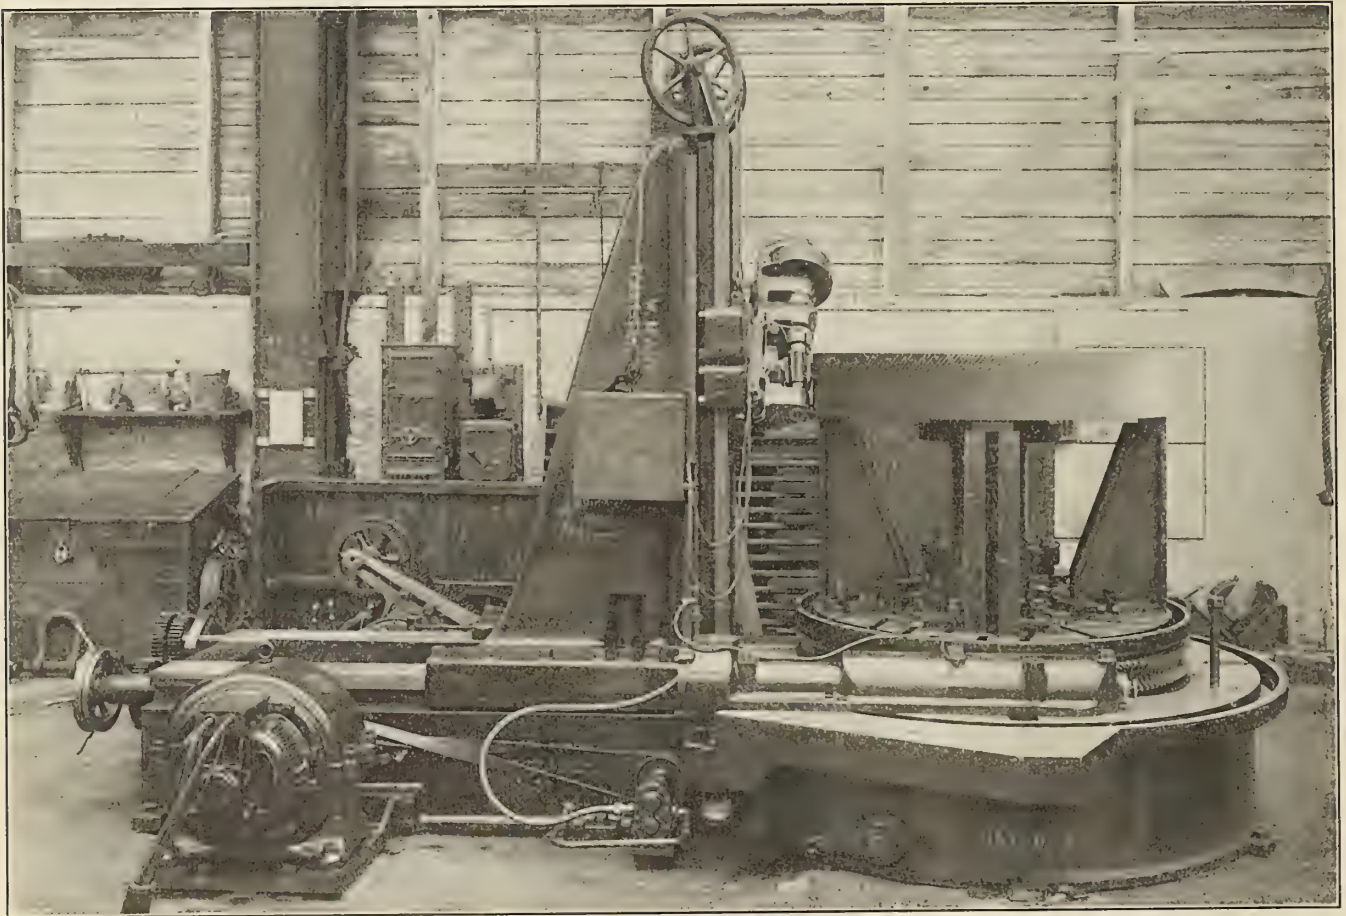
Type of Machine Ordinarily Adopted for Cutting Teeth on Reduction Gear
